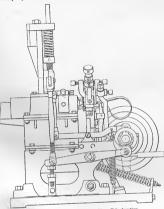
Pisotal typecasting machine. Side elevation.
